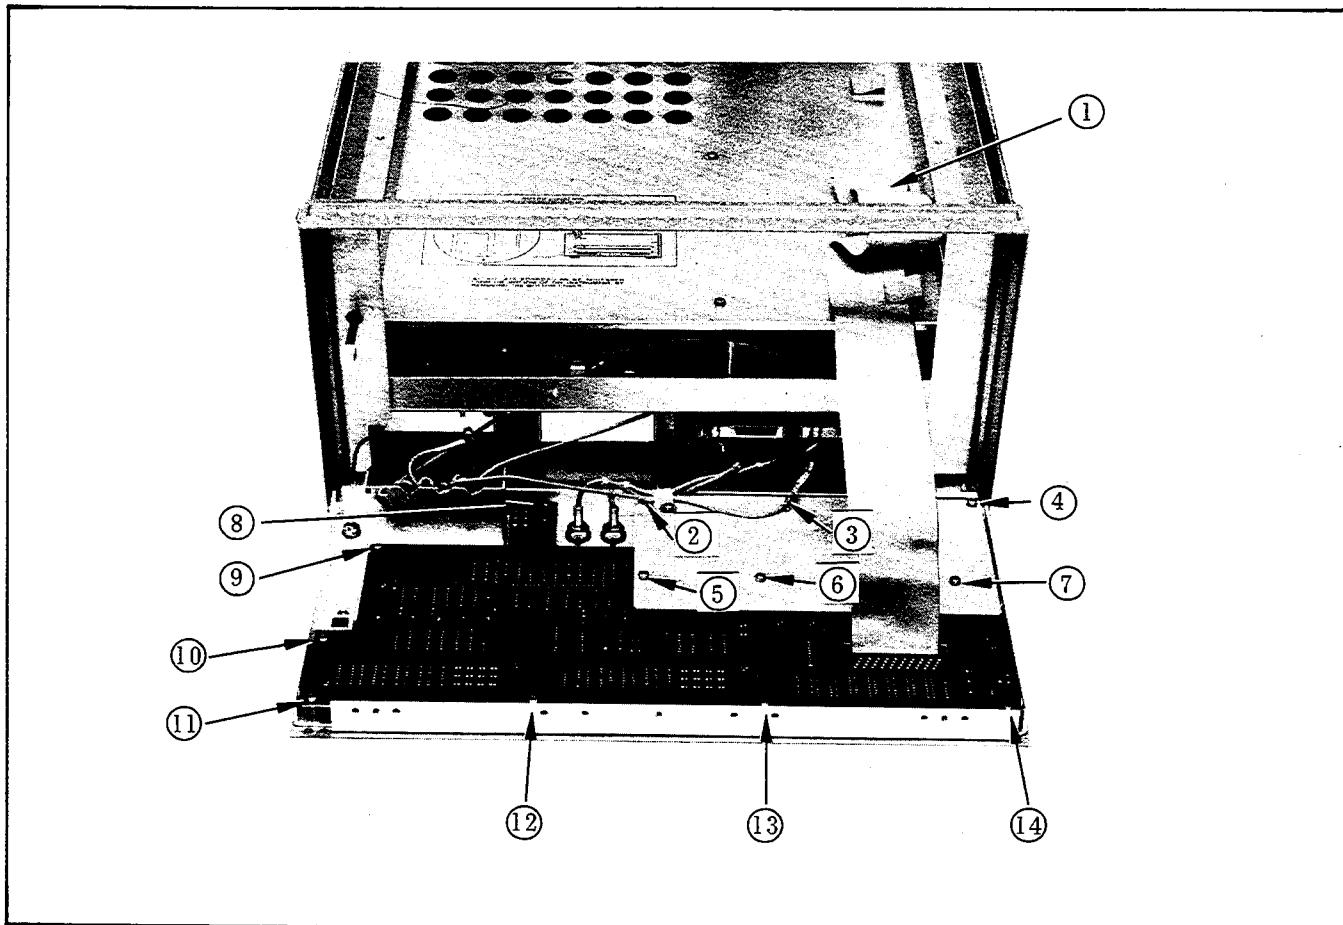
A5 Display and Keyboard Control Board Disassembly.
